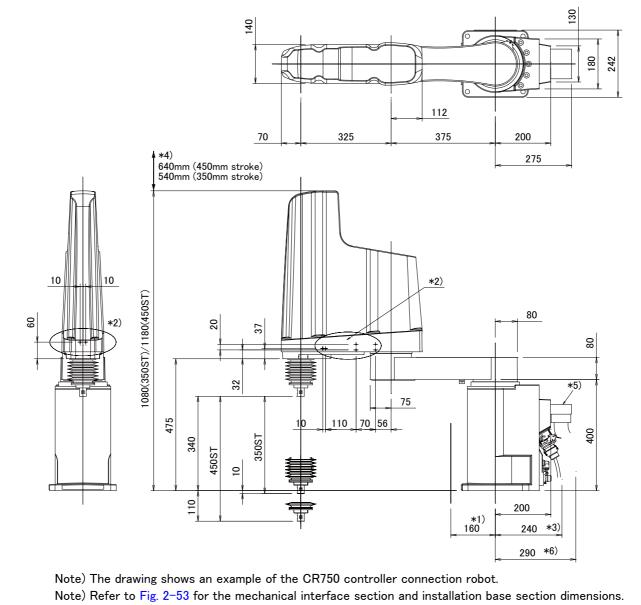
Outside dimensions of RH-12FH70xxC/M
